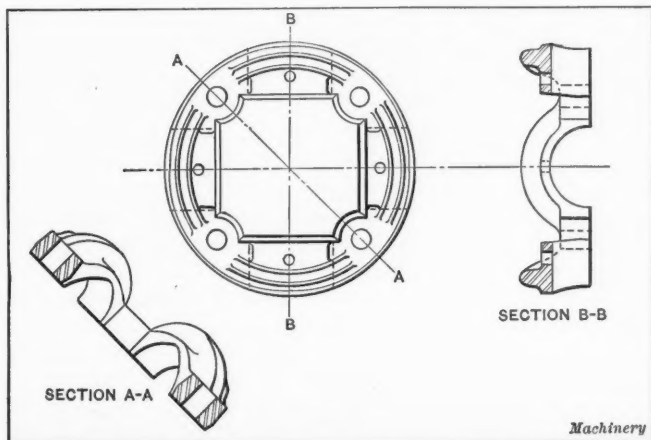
Type of Universal Joint Ring drilled on Machine shown in Fig. 1
